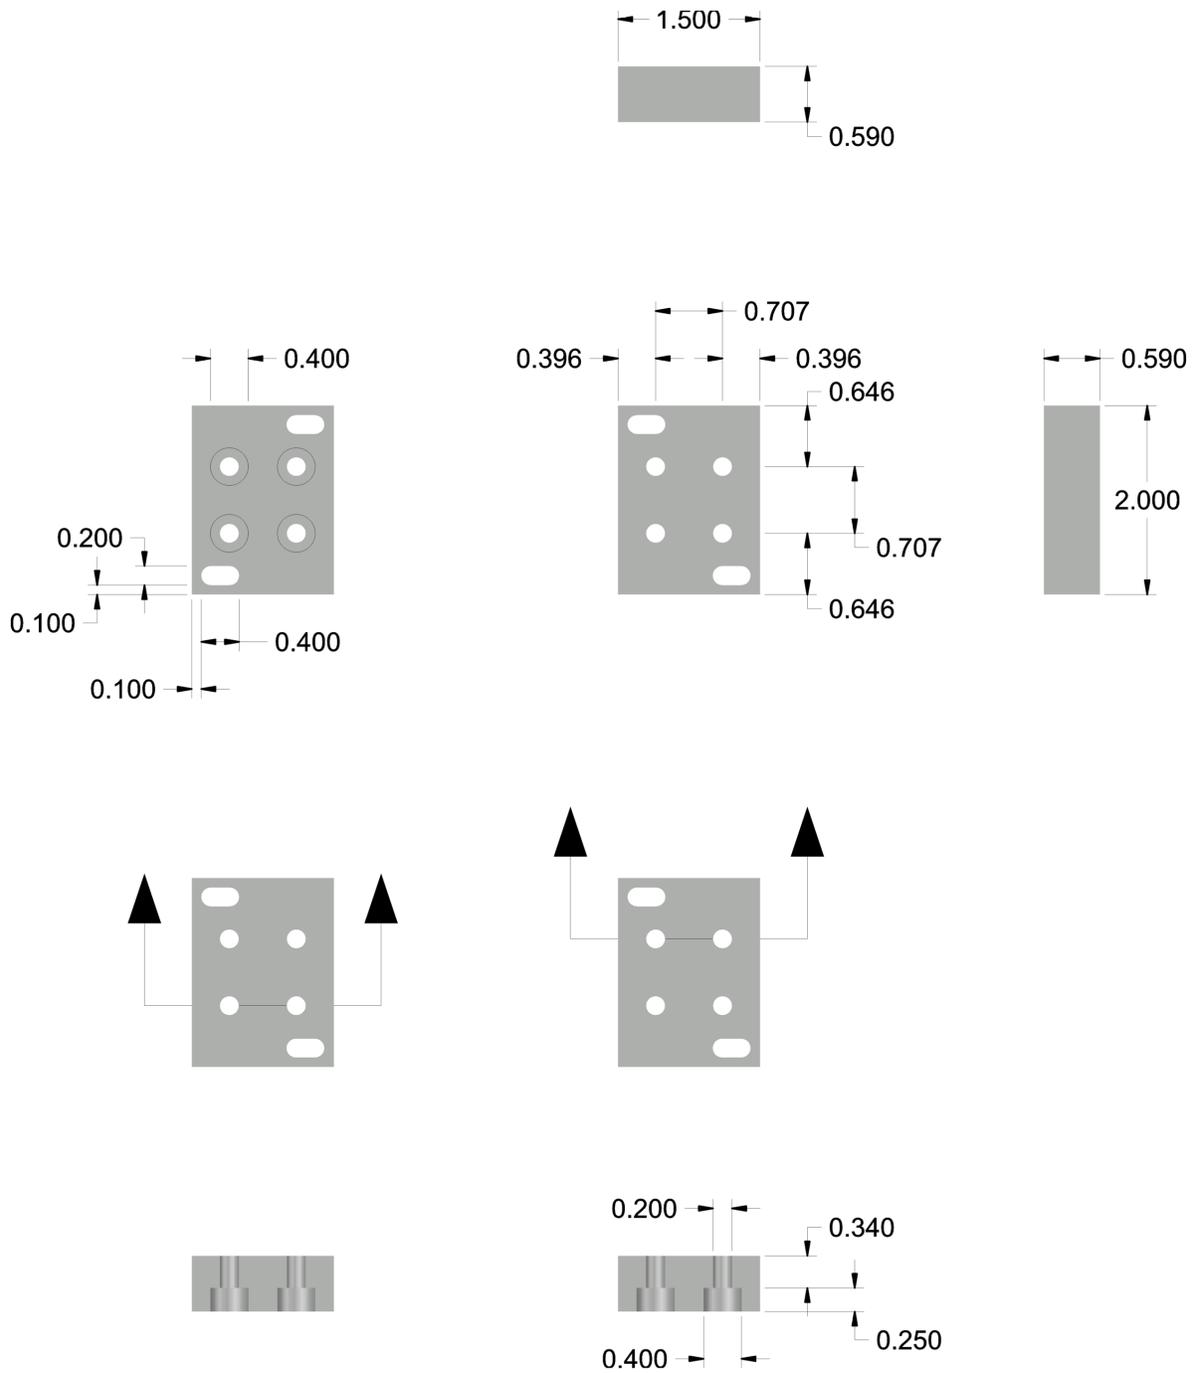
Orthographic drawings of mounting blocks for two-way pneumatic valves
